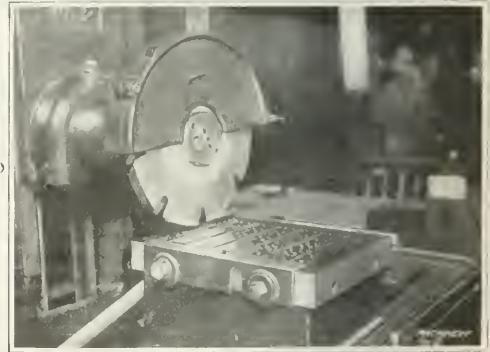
Method used in holding a Number of Very Thin Pieces on a Head Magnetic Chuck
